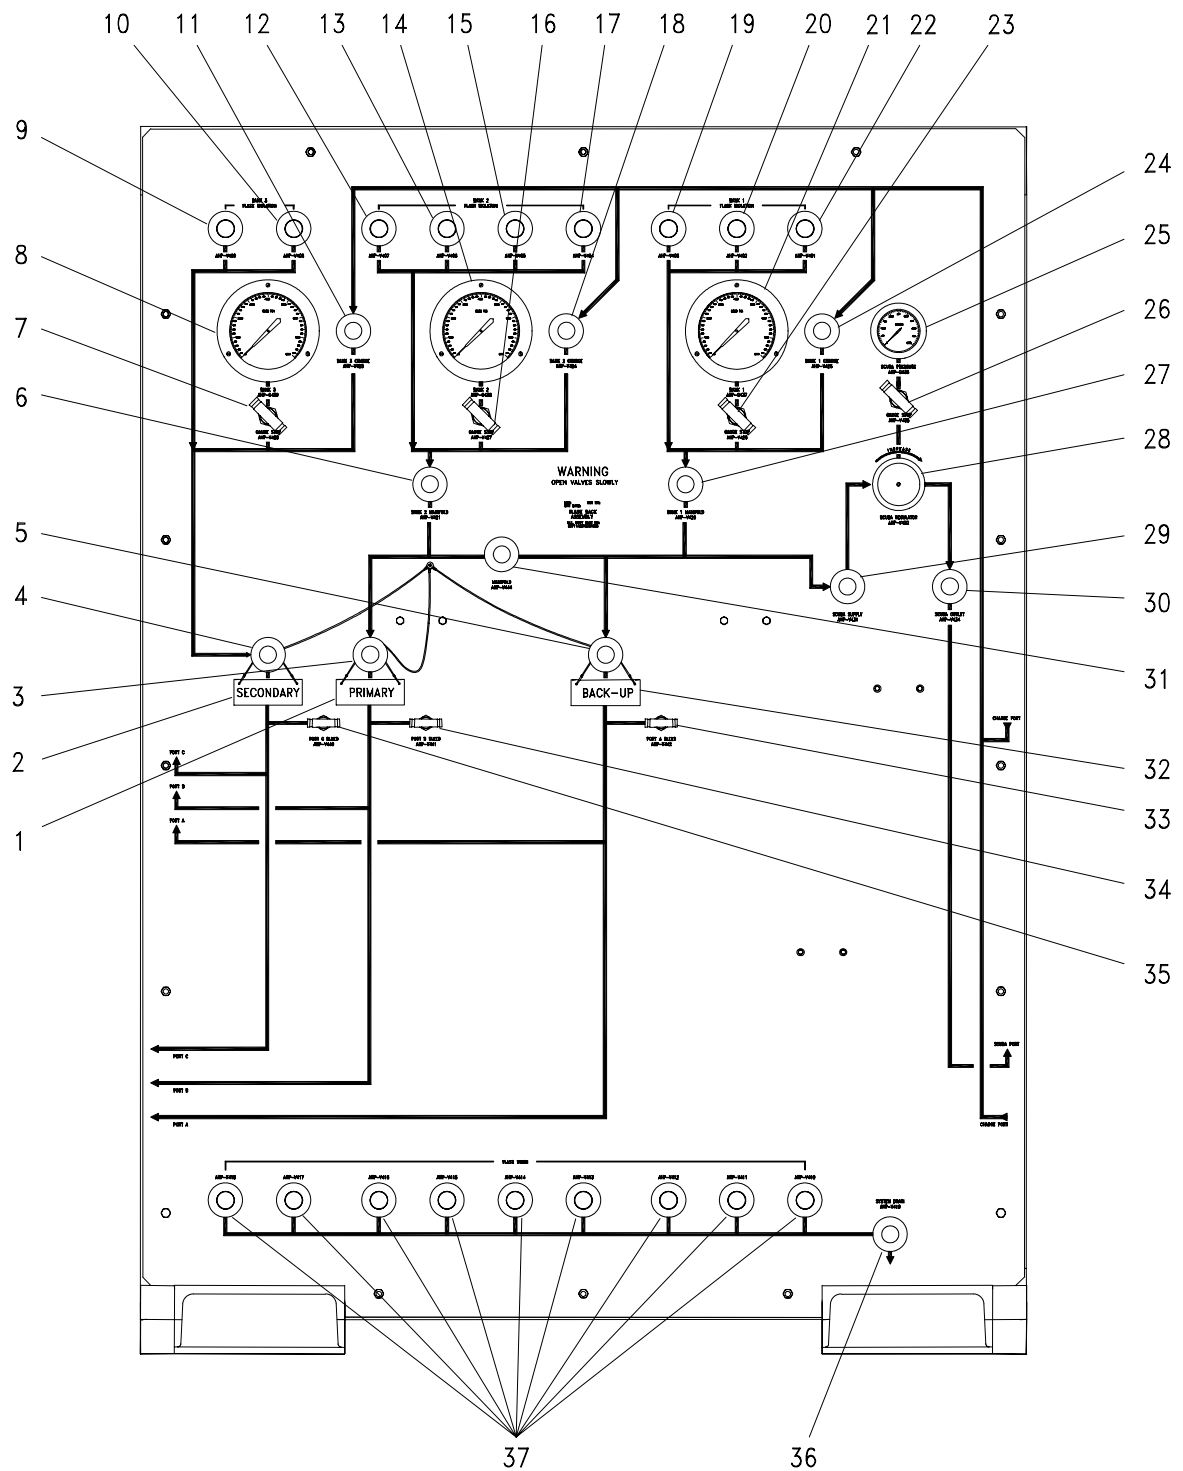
Air Supply Rack Assembly (ASRA) Controls and Indicators
